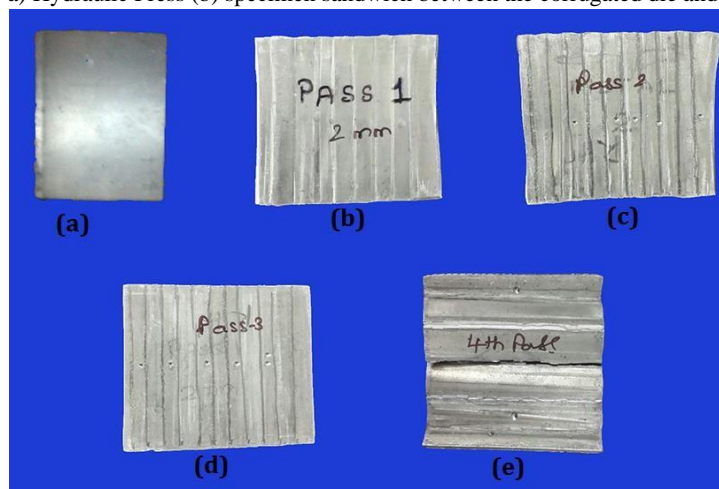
CGP specimens a) as cast specimen without pressing , b) After 1st pass
